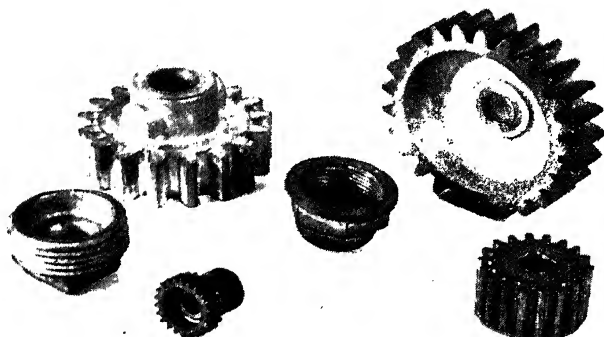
Gears and threaded pressure die-castings in zinc-base alloy
